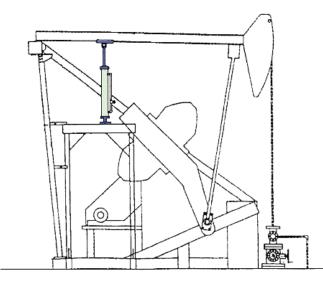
Mark Pumping Unit with BMGC behind the gear box [19]
